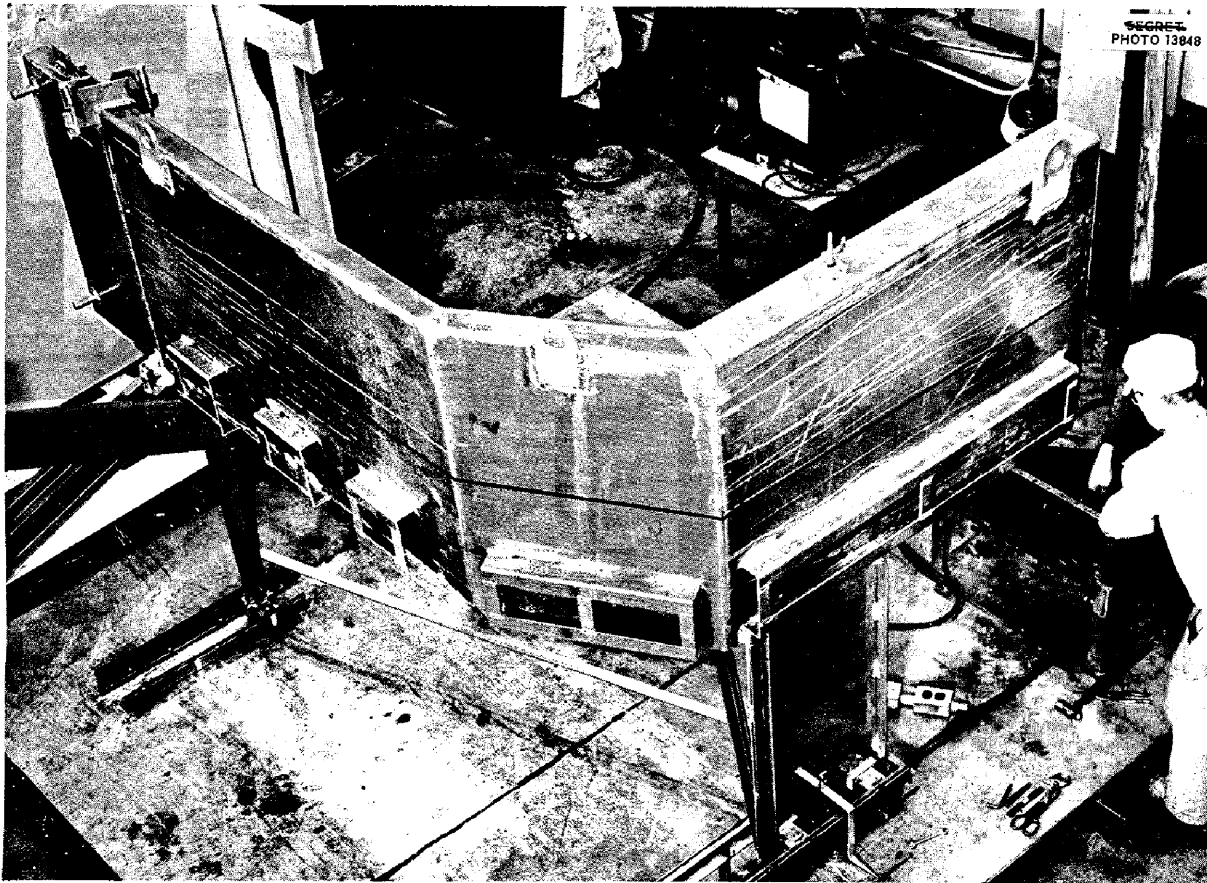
GE-ANP Duct Mockup Assembly.
